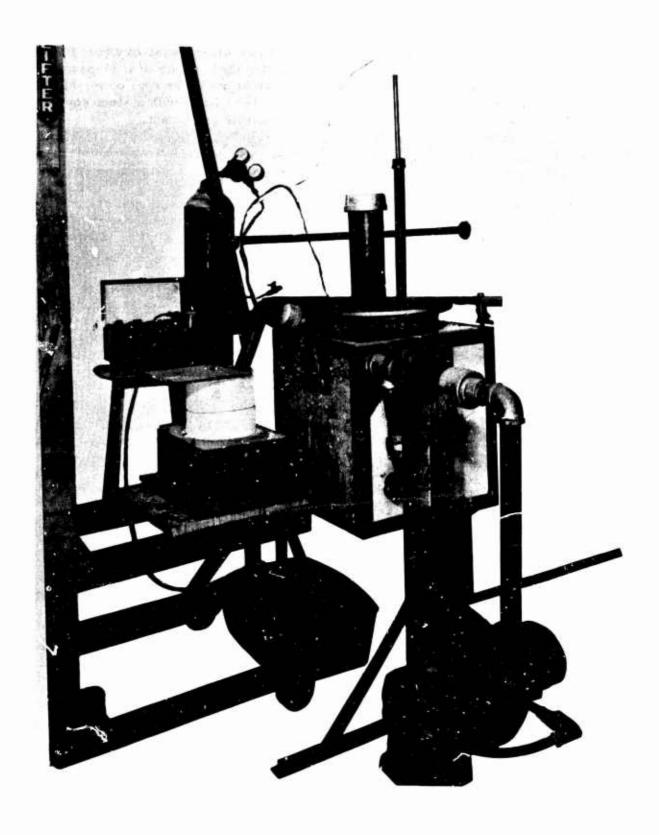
MAGNESIUM-LITHIUM FURNACE SHOWING MOLD IN POSITION PREPARATORY TO POURING
